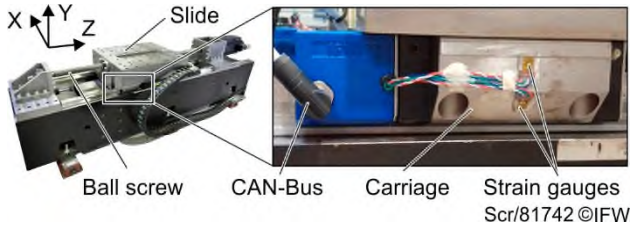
Linear axis test rig and prototype of force sensing guide carriage
